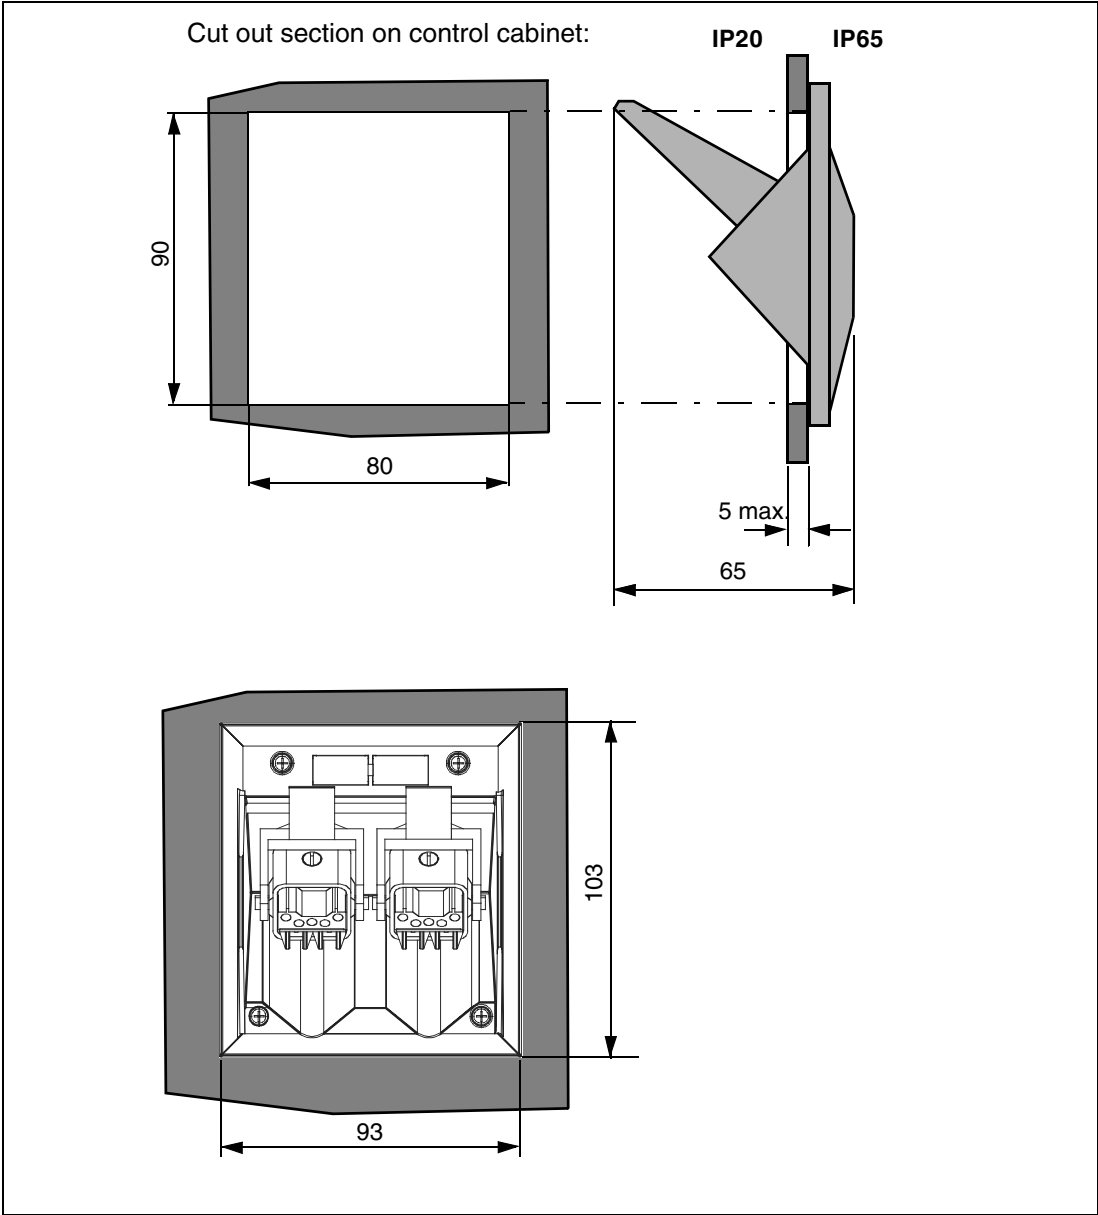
Dimension drawing of the hybrid field bus connection
